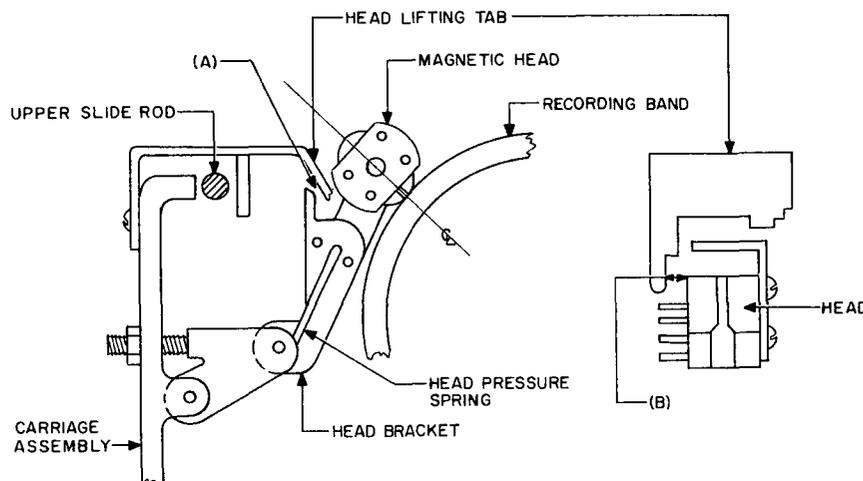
Upper Slide Rod Details (Head in Recording Position)
